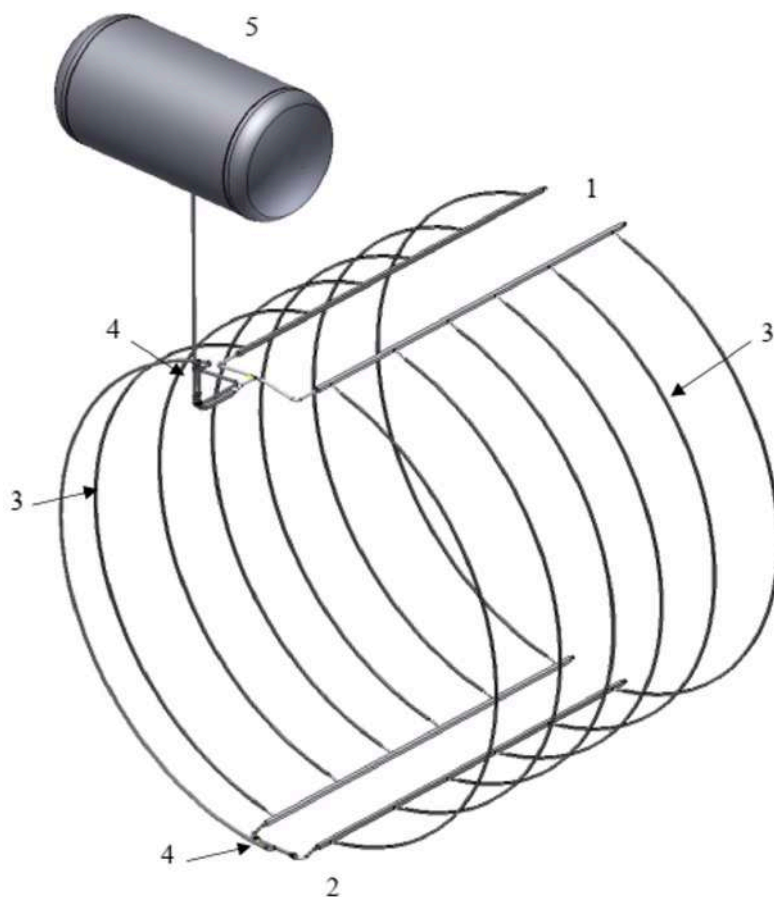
Design of the cooling cold mass circuit: 1 – upper manifold; 2 – lower manifold; 3 – syphon tubes; 4 – Al-SS bi-metal adapters; 5 – vessel with liquid helium.
